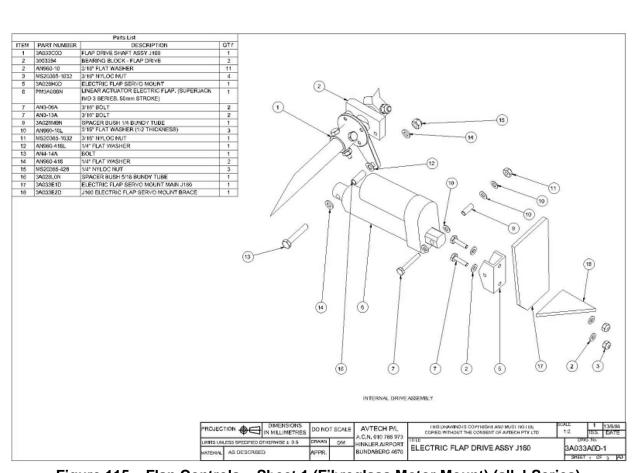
Flap Controls – Sheet 1 (Fibreglass Motor Mount) (all J-Series)
